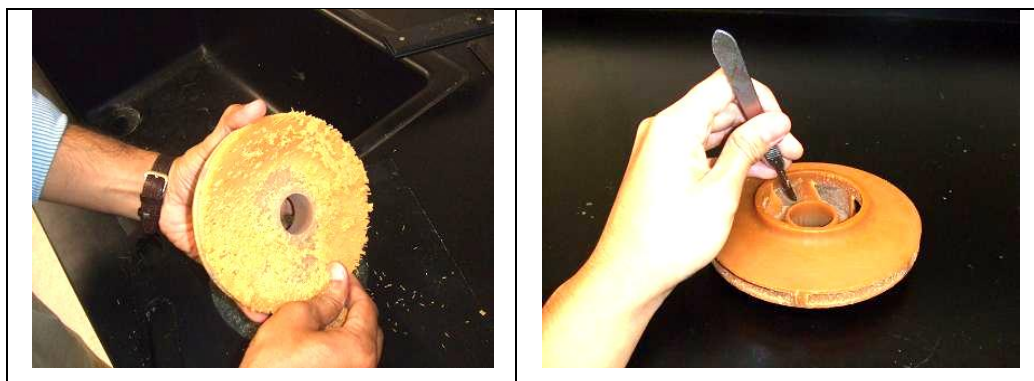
Post-processing of Rapid Prototyped Impeller.
